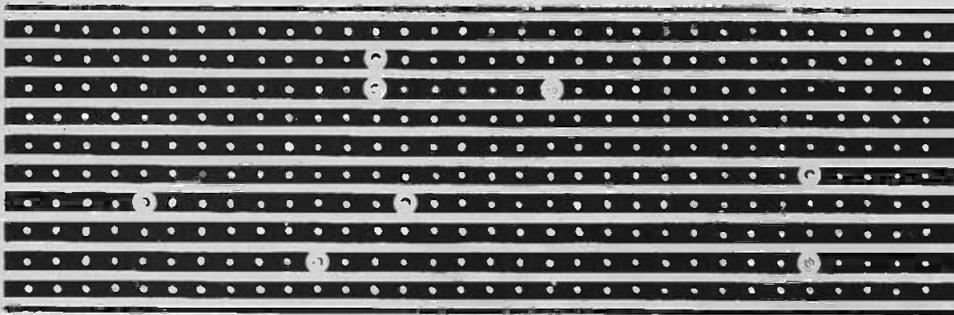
Veroboard is shown here full size — a sharp drill should be used to interrupt the copper tracks where shown.
